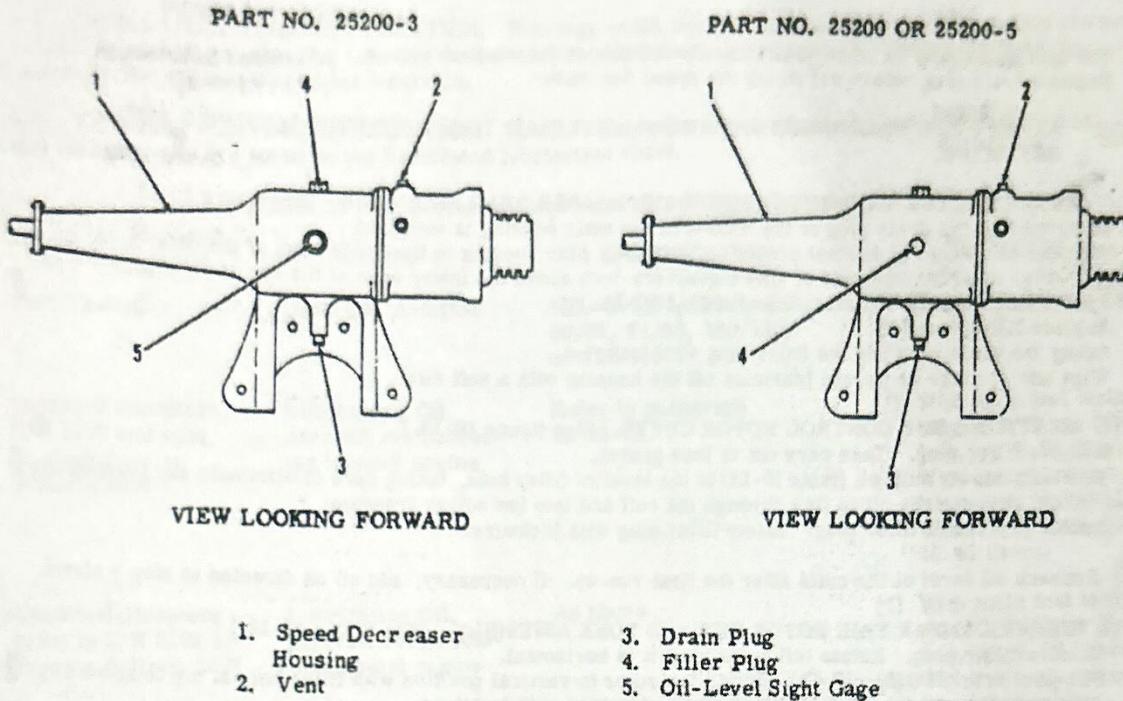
Servicing the Tail Rotor Speed Decreaser Gear Assembly
